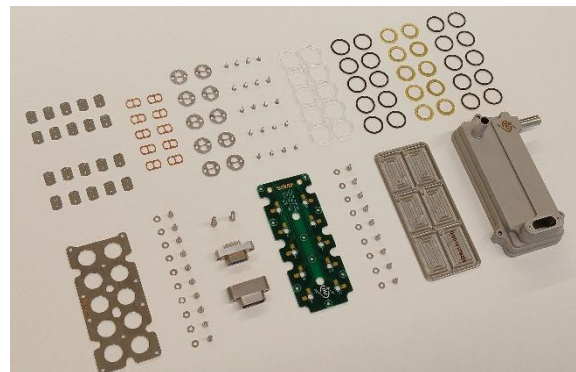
miniMPL Flight Model pump exploded view, showcasing all the individual components that are used inside. Order of assembly is top left to bottom right.
